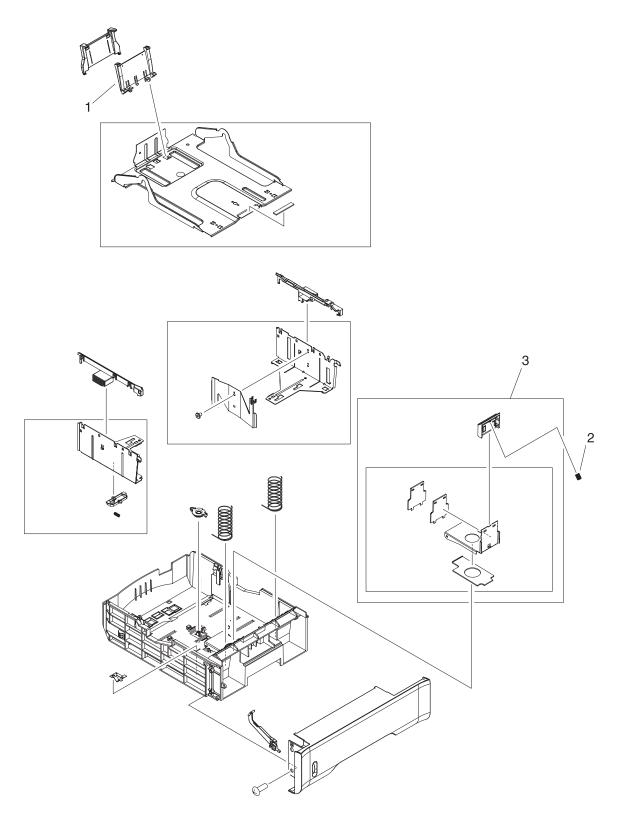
500-Sheet paper feeder tray (Tray 3)
